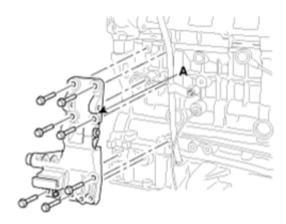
Identifying Tensioner Assembly Integrated Bracket Courtesy of KIA MOTORS AMERICA, INC.
